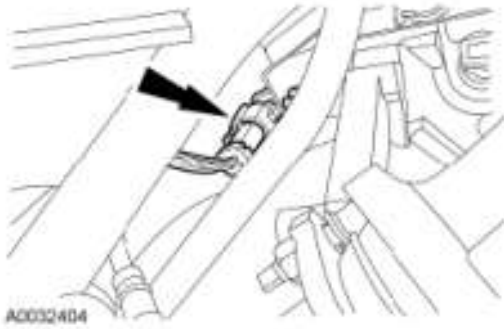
Locating Front Heated Oxygen Sensor Electrical Connector
